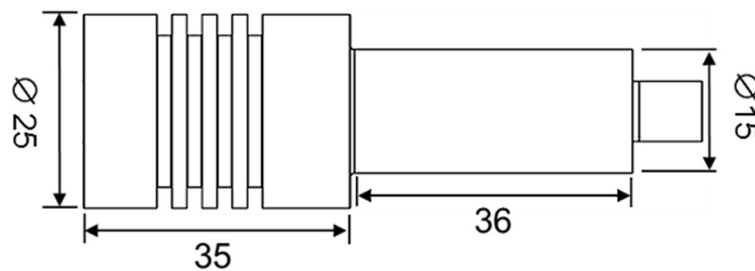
Basic dimensions (mm) of the H13 FSP tool
